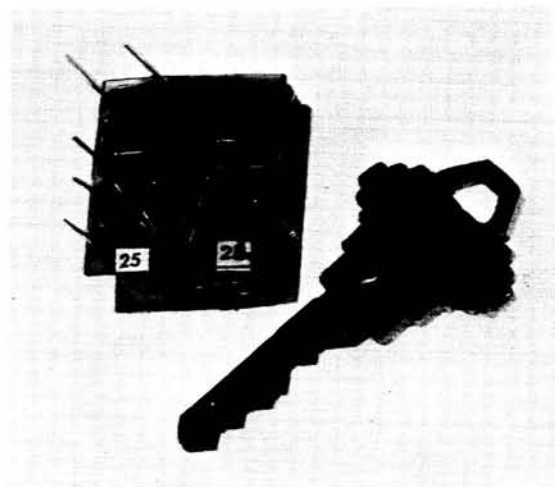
Welded electronic module (ready for potting).
